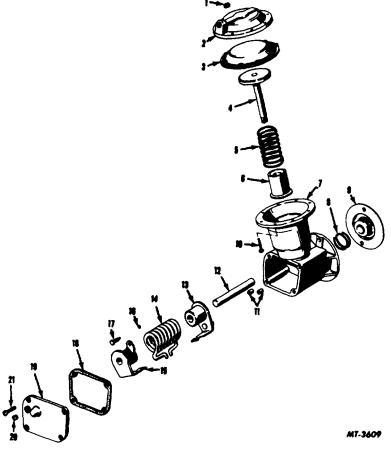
Air-Torsion Spring Shift Unit (Exploded View) Legend for Fig. 12Z
